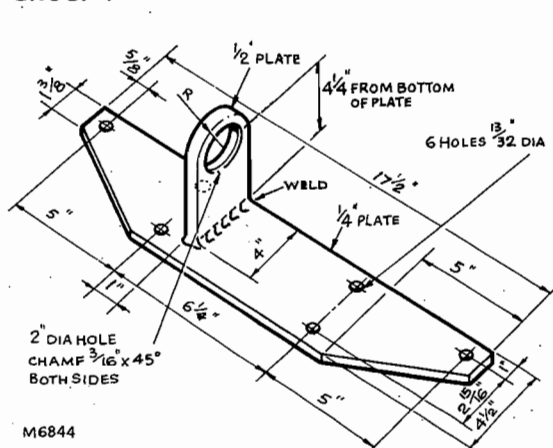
ENGINE REMOVAL STAND APPLICATION
